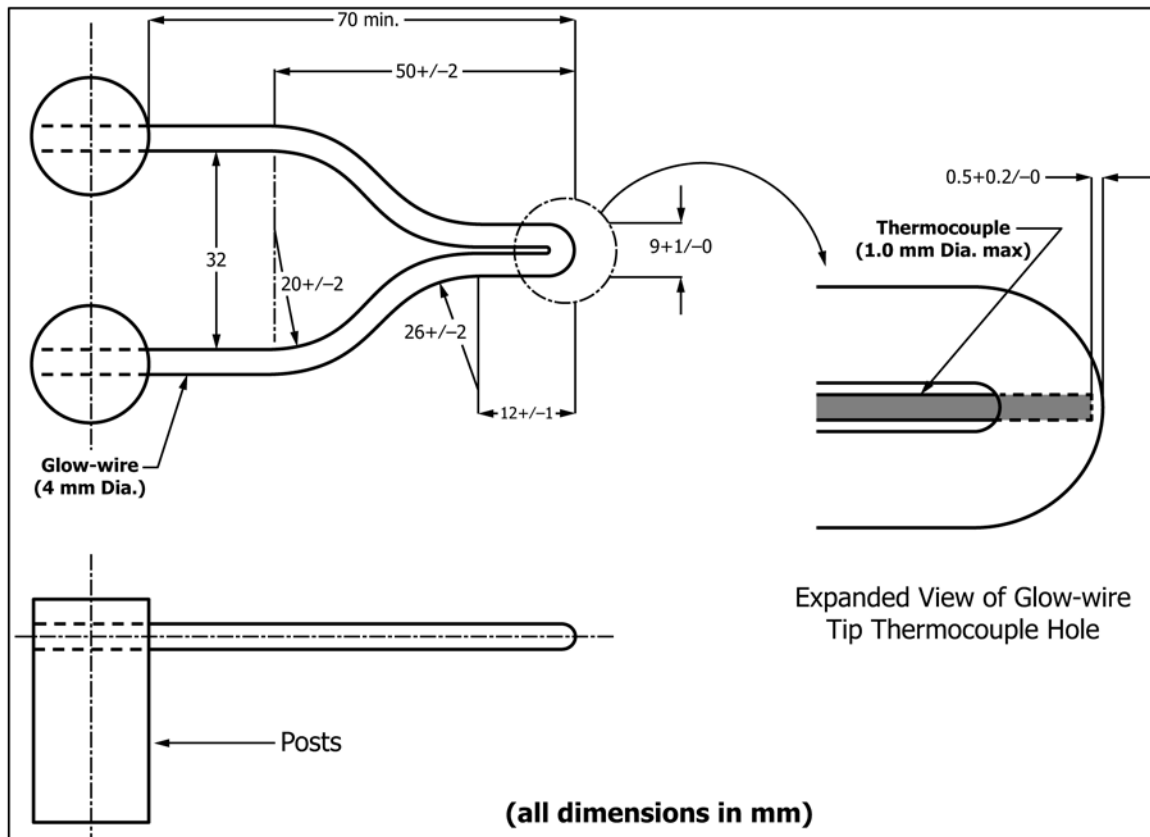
Glow Wire Apparatus from Test Method D6194, Including Positioning of the Thermocouple
